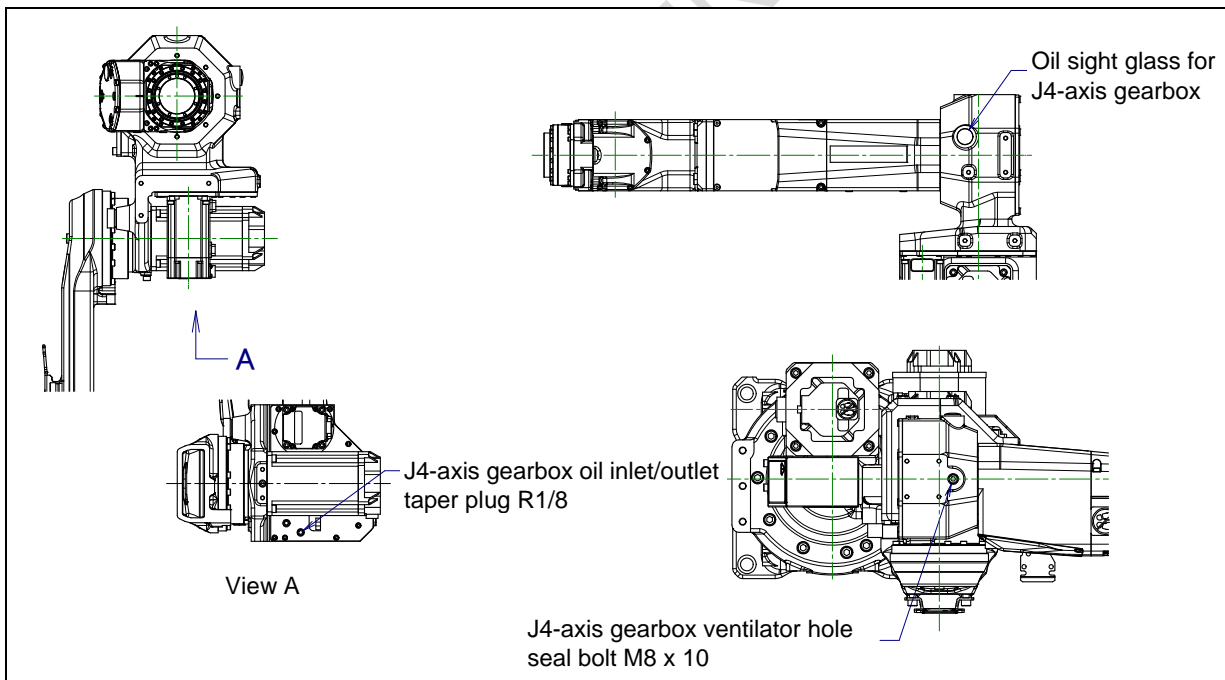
(c) Greasing point of J4-axis gearbox
